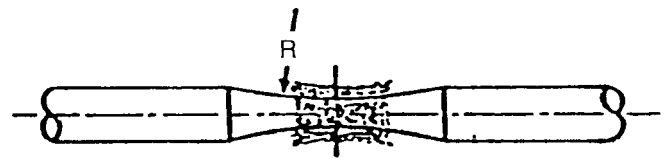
Specimens With a Continuous Radius Between the Ends for Rotating Beam or Axial Loading
